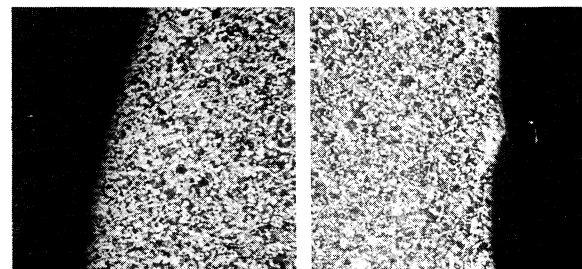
Photomicrographs of a properly roll-finished gear tooth. The approach side, left, has no seaming. The trail side, right, shows no slivering or cold-working.
